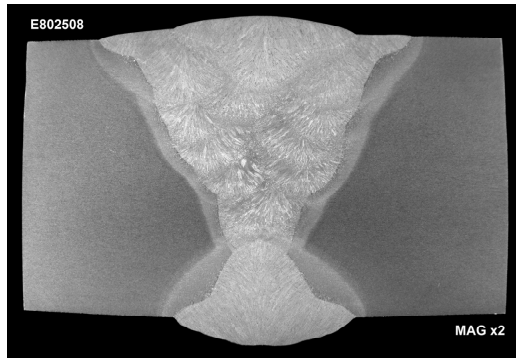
Submerged arc weld of 35mm thick EH 46 plate.
